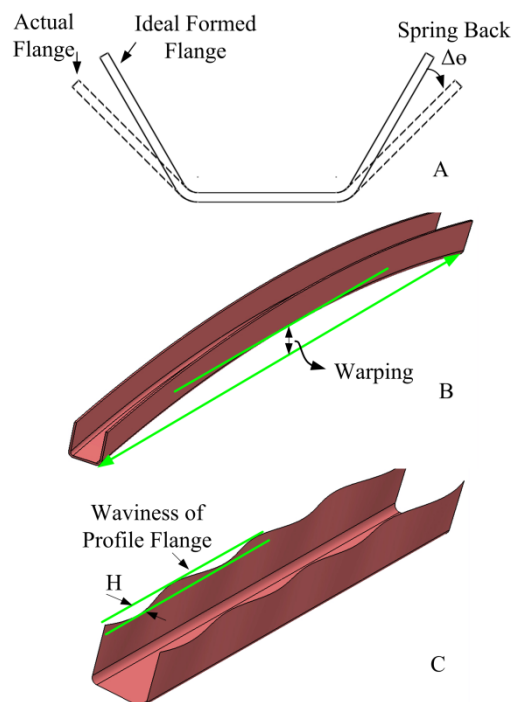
Roll forming defects A: spring back, B: warping and C: flange waviness
